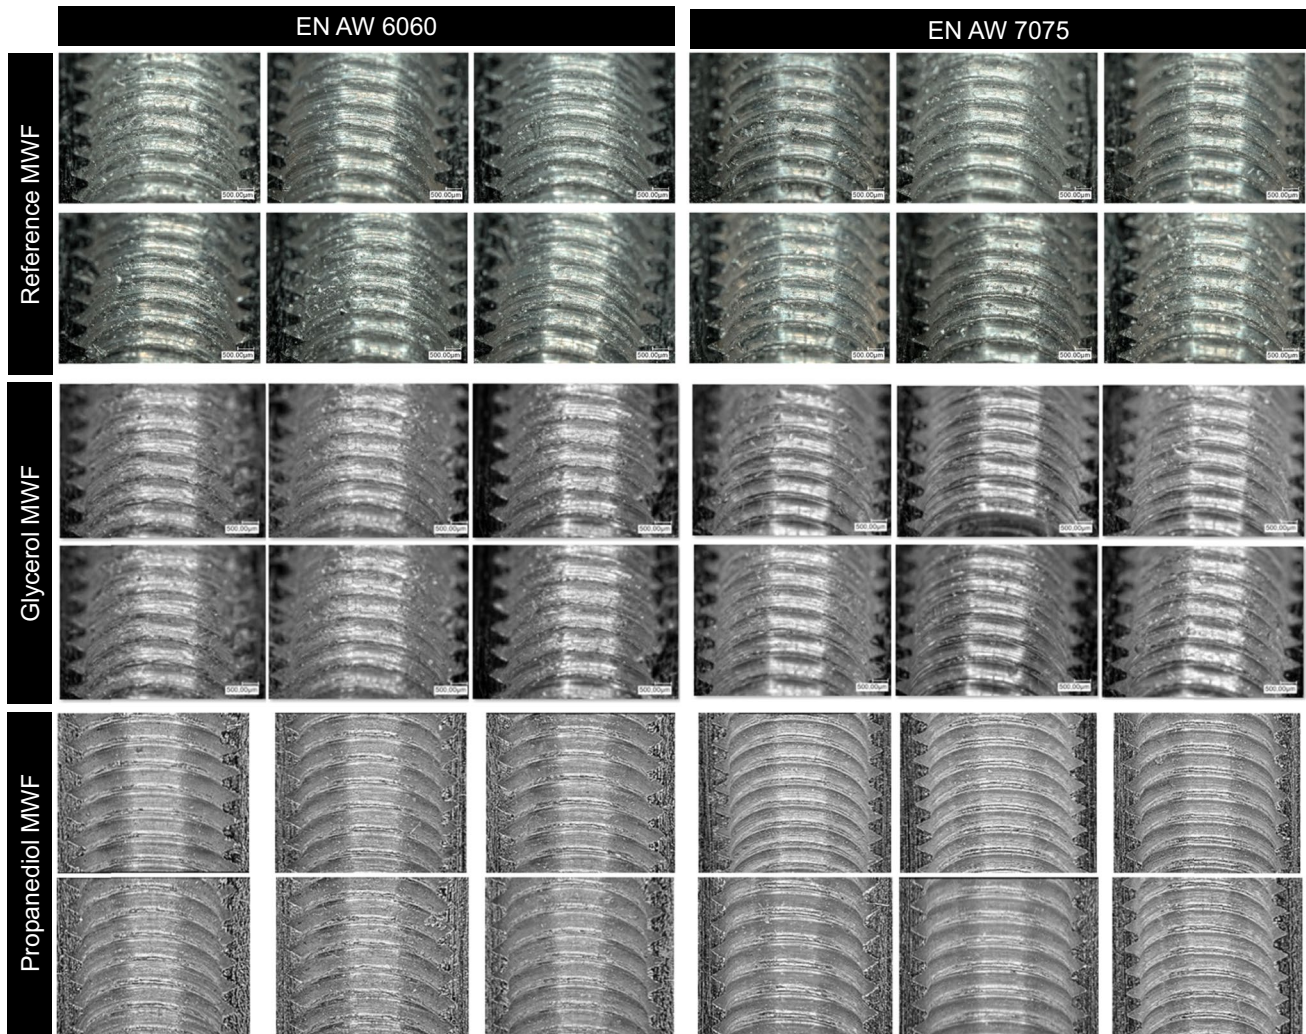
Surfaces of six threads from the first machined block, respectively, for all materials and fluids
